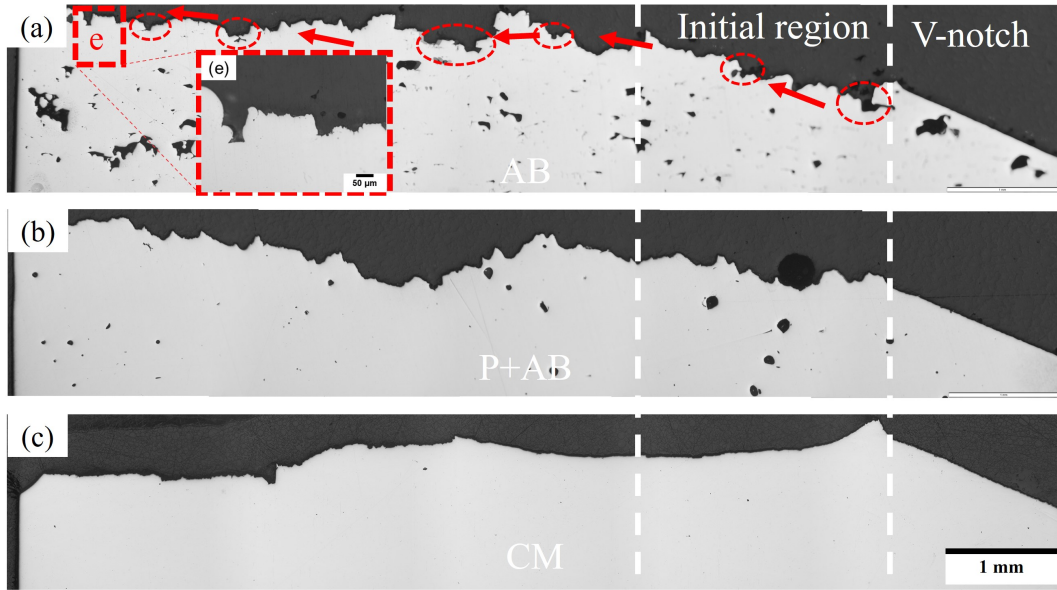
The side fractography of specimens after Charpy impact test [124]. (a) AB, (b) P+AB and (c) CM.
